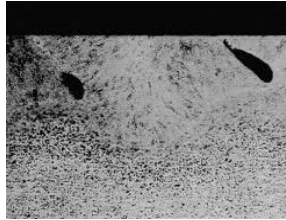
Inclusions and other impurities in weld joints
